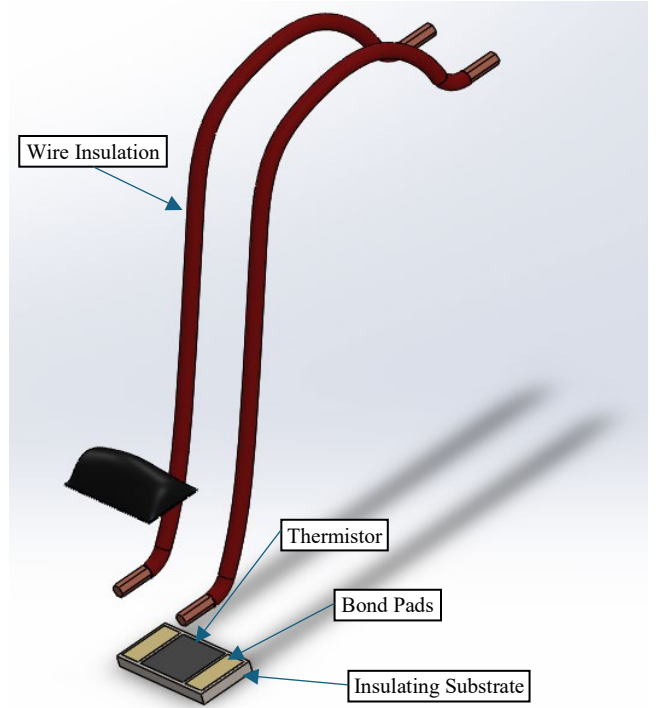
Exploded 3D model view of the on-chip NTC thermistor.
